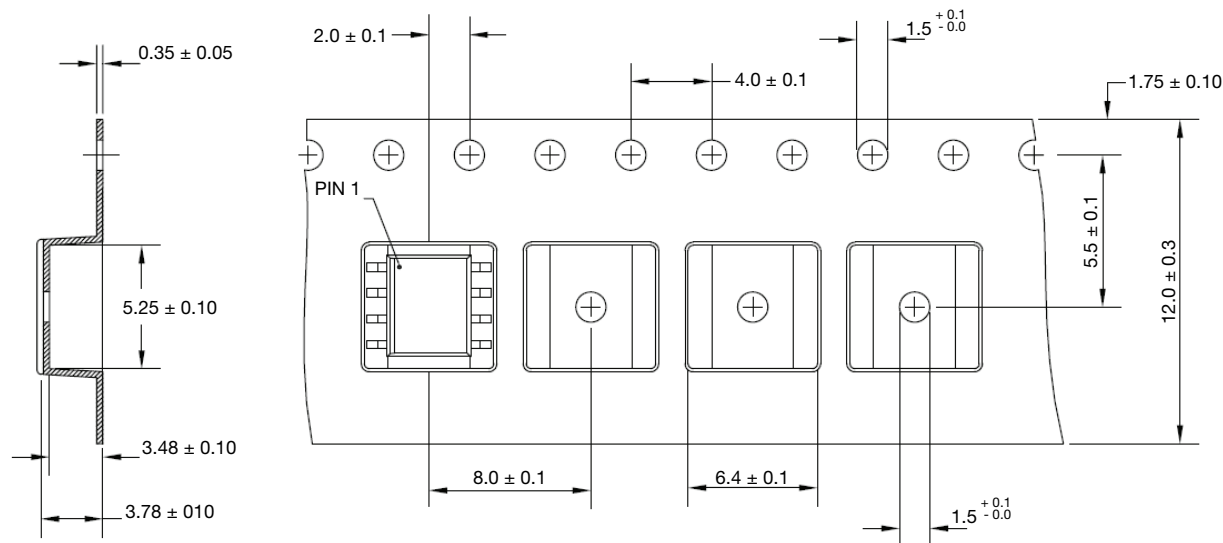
Tape and Reel Packing (2000 pieces on reel)
